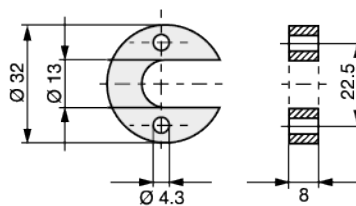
Installation dimensions of BTL-P-1013-4S magnet
